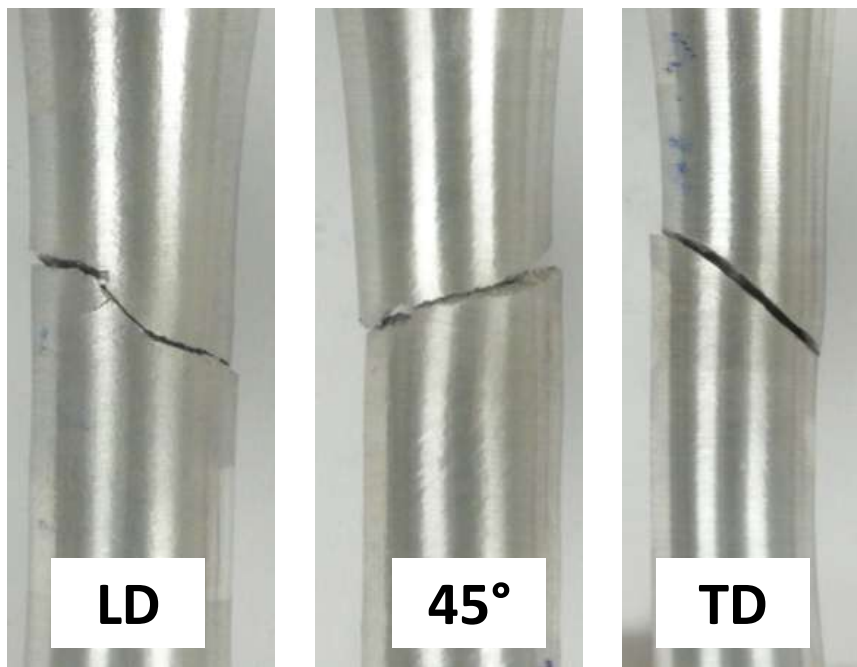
Fractured specimens for compressive tests at LD, 45° and TD.
